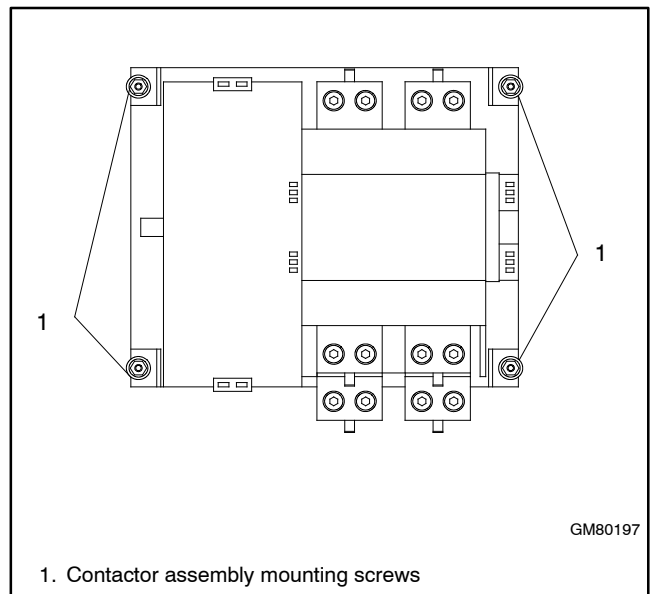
Contactor Mounting Screws, 300/400 Amp Models
